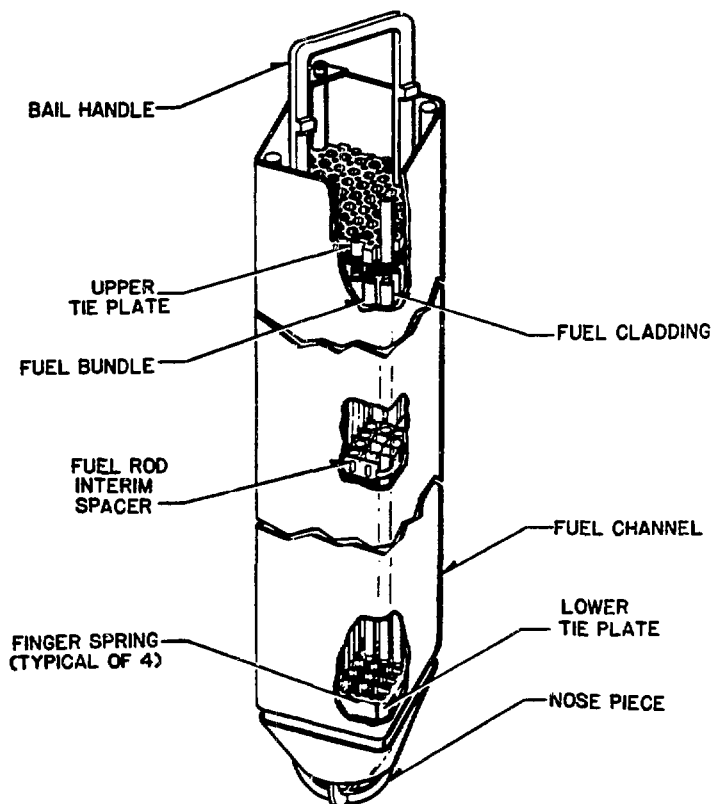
BWR fuel assembly - shortened cutaway view.³
